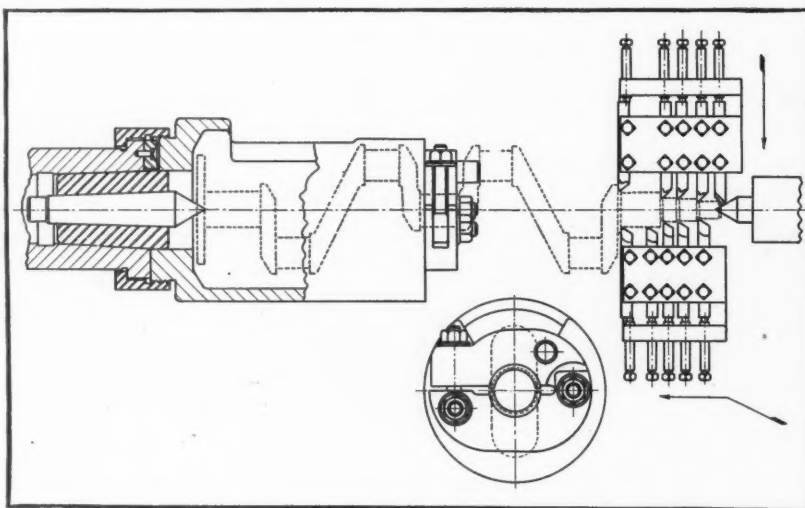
Tool Set-up in which the Spindle Fixture used in Fig. 12 is also employed
